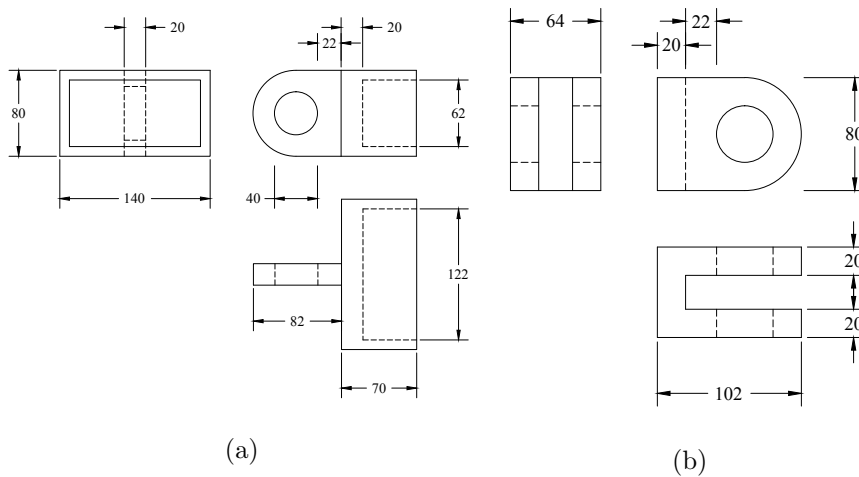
Pinned Connection Details; (a) Male connection; (b) Female Connection. All dimensions are in mm.
